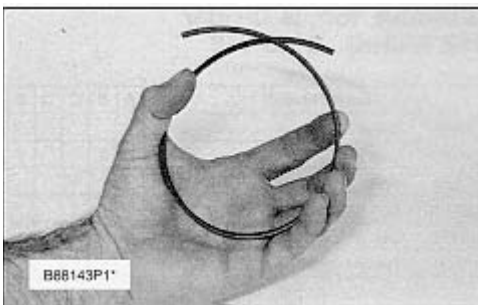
Wrong Method To Make (Non-Metal) New Seal Rings Ready For Installation.
